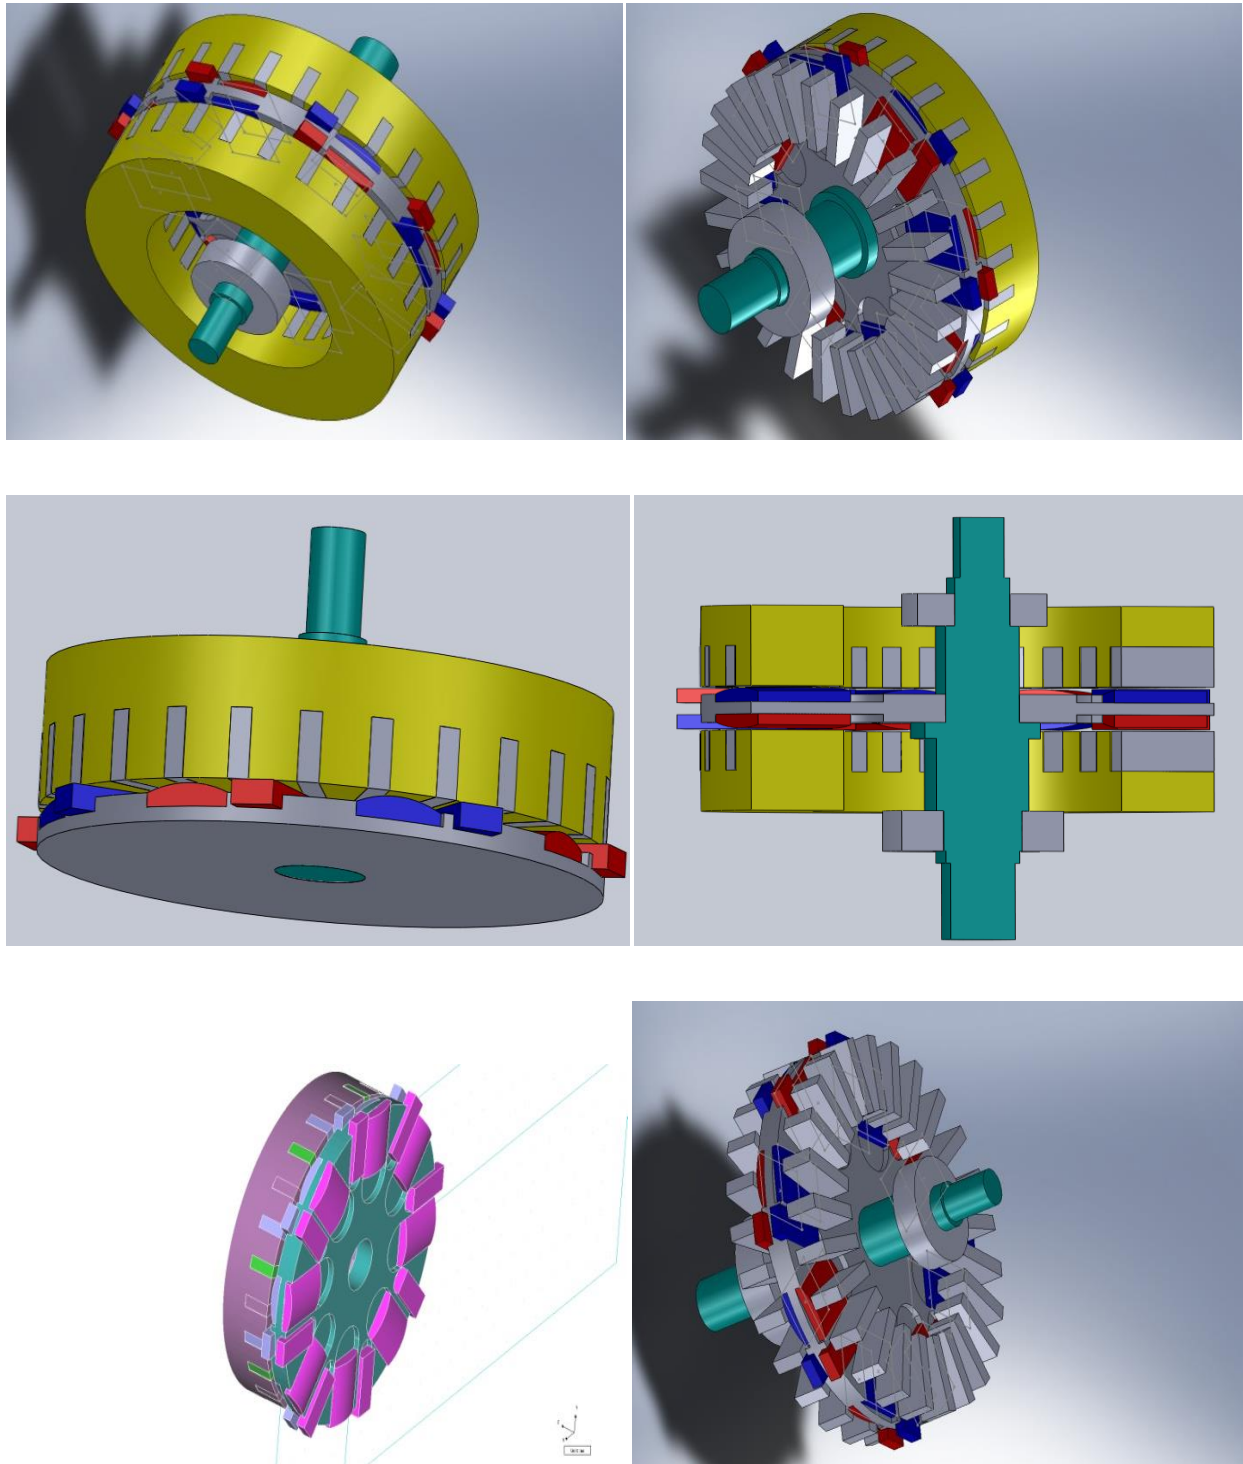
Magnetic circuit parts of the AFIPM machine prototype topology under study.
